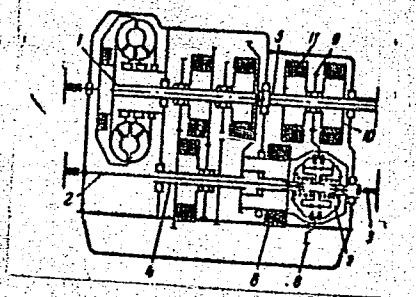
1--input shaft; 2 and 3--output shaft; 4 and 5--intermediate shaft; 6--multidisc friction clutch; 7--differential housing; 8 and 9--constantly engaged gears; 10 and 11--multidisc friction clutch housings
